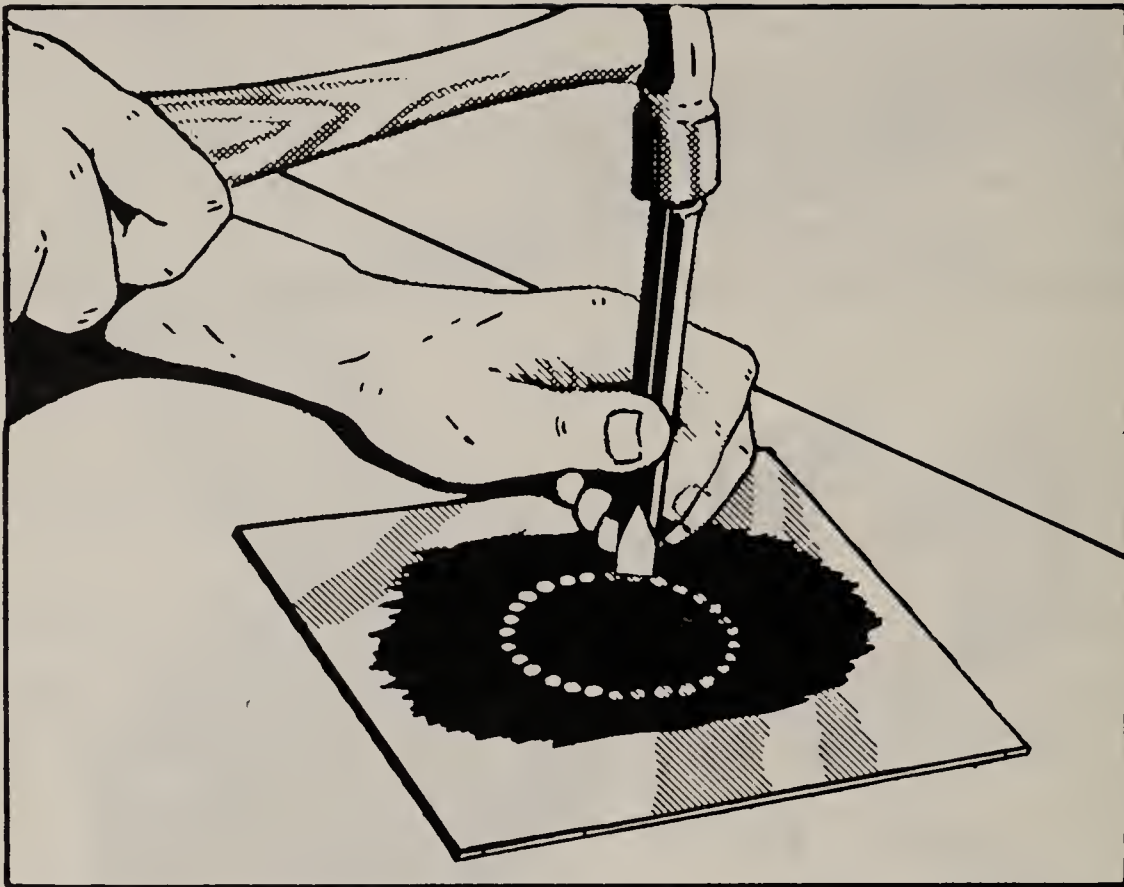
The correct way to hold hammer and chisel when cutting sheet metal. To cut out a hole, use a narrow chisel so that the shape of the cut will conform closely to the line, thus the amount of filing necessary for finishing is reduced.
